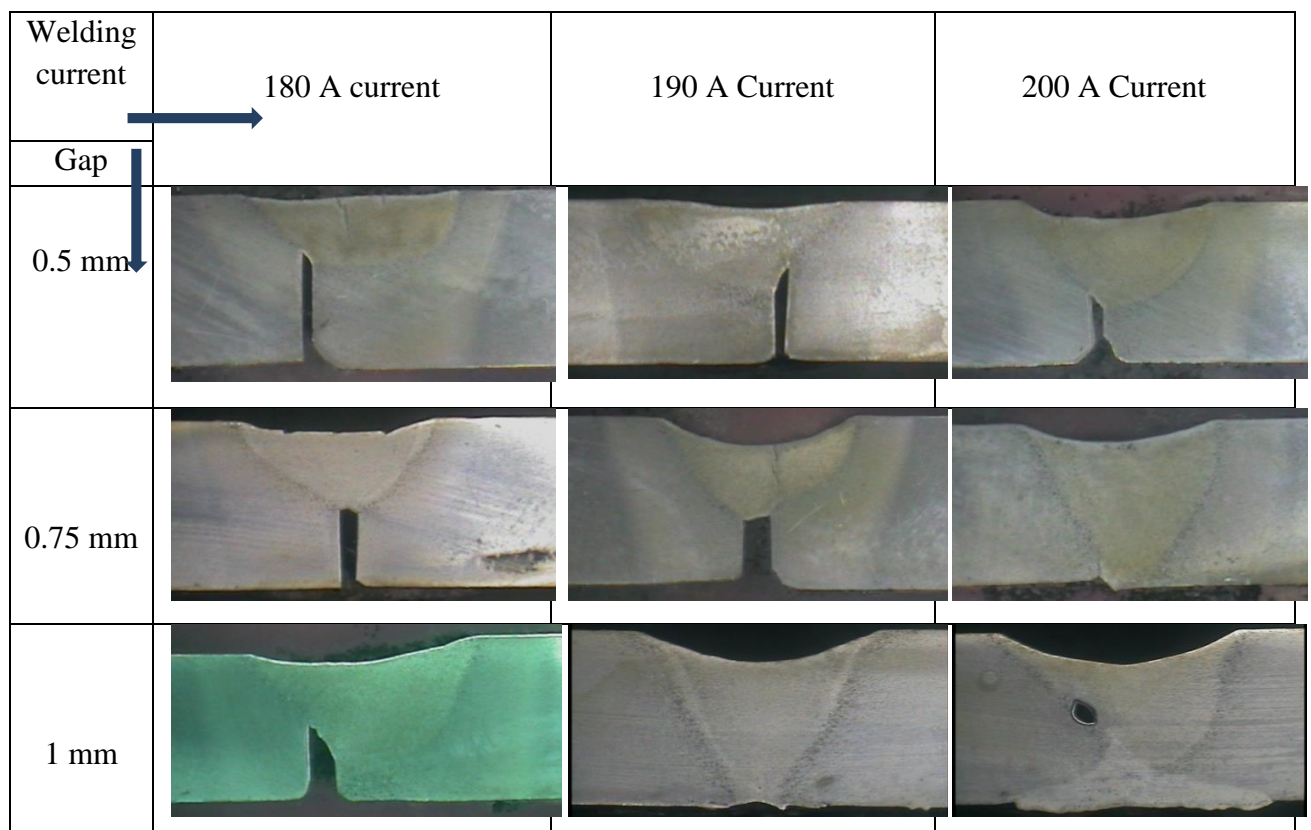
Optical microscopic Image at weld zone of TIG welding done with different welding current and gap between workpiece
